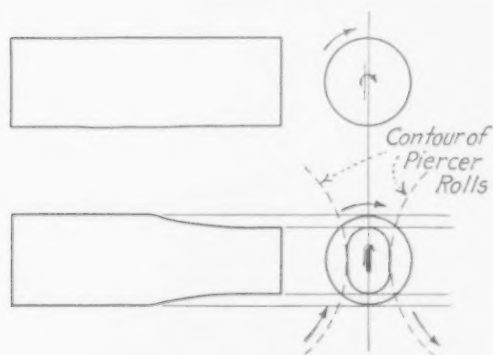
Action of rotary piercing mill on internal structure of billet. A hole would be opened up, even without the mandrel point.
